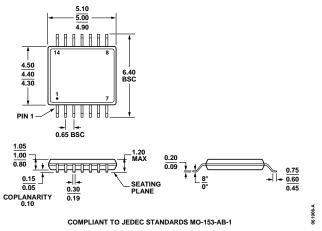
14-Lead Thin Shrink Small Outline Package [TSSOP] (RU-14) Dimensions shown in millimeters
